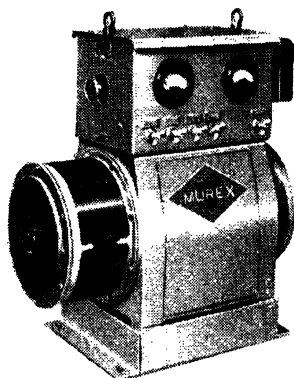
300/400 Ampere Motor Generator Equipment.
